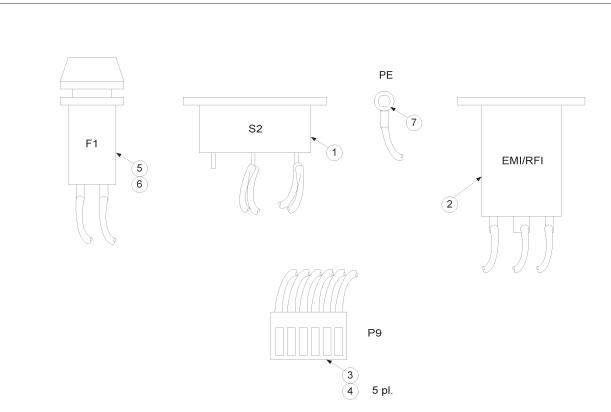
VOLTAGE SELECTOR SWITCH ASSEMBLY EXPLODED VIEW
